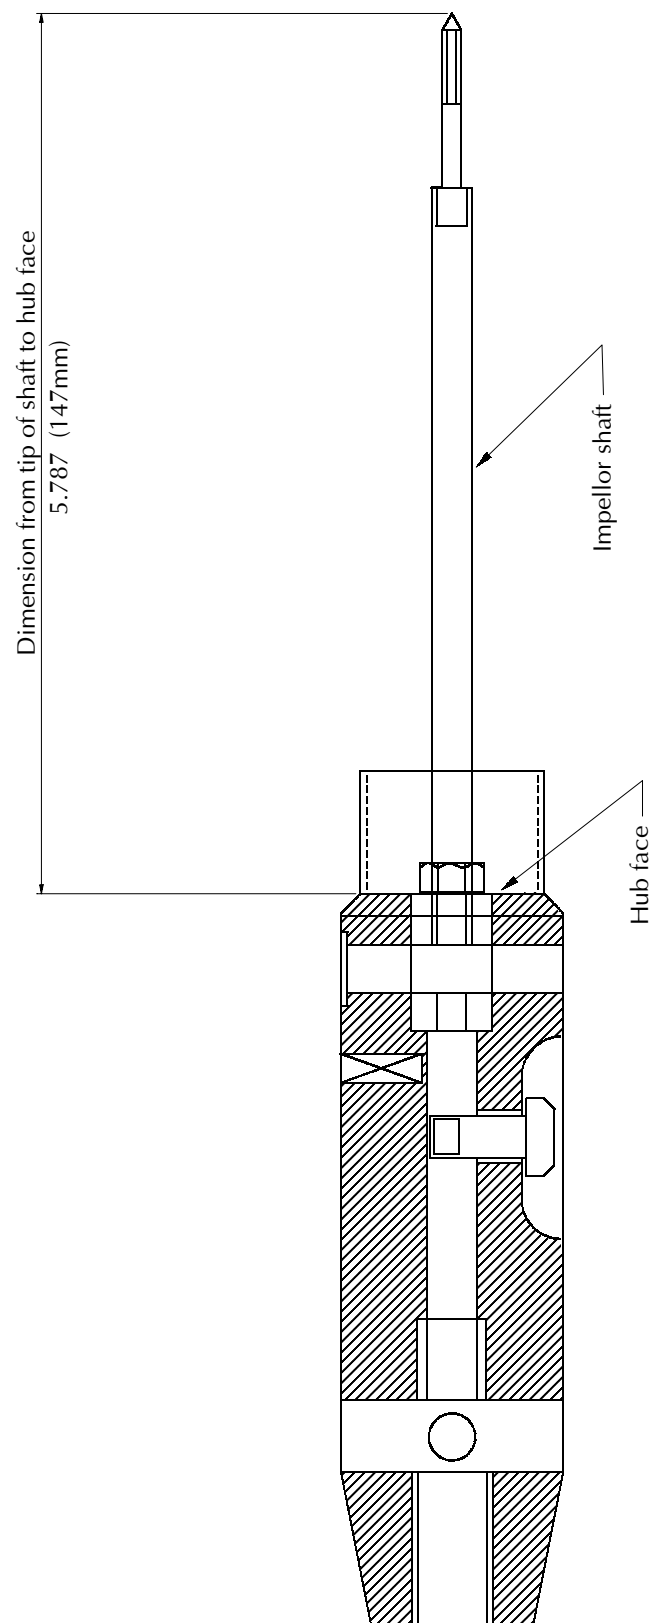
BFM001 IMPELLER SHAFT SETTING
